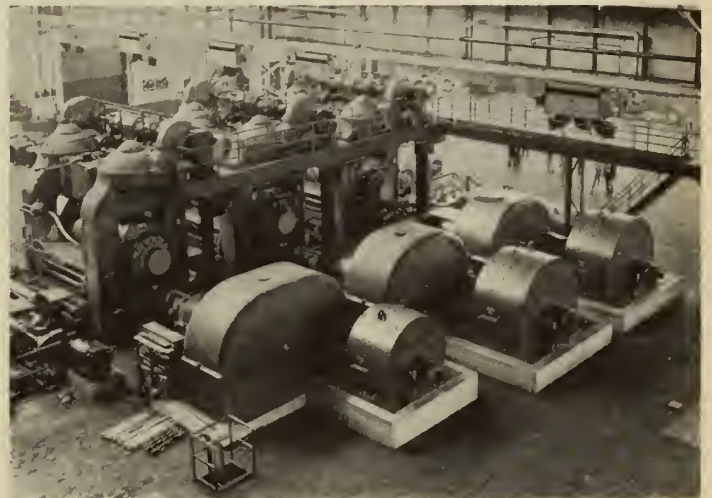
98 in. wide three-stand tandem cold reduction strip mill. No. 1 mill motor is 1,500 hp., No. 2 and No. 3 each 2,500 hp. and the reel motor is 600 hp.
